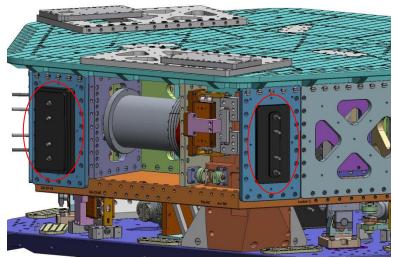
Adjustment Mass stacks on Small Panel Outer Walls. These configurations are shown only as examples. Vent grooves in Masses must face the Outer Wall.
